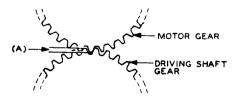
Engagement of Motor and Driving Shaft Gears
